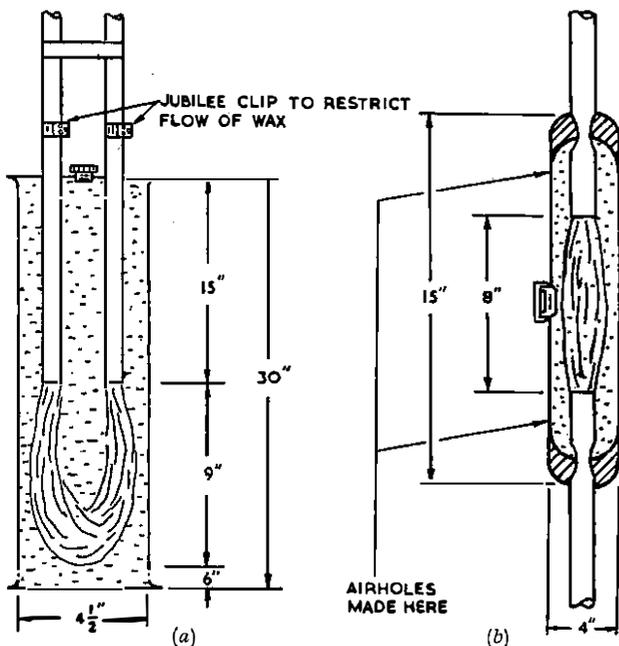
TWO TYPES OF GAS SEAL: (a) WAX-FILLED, (b) COLD-SETTING RESIN.
